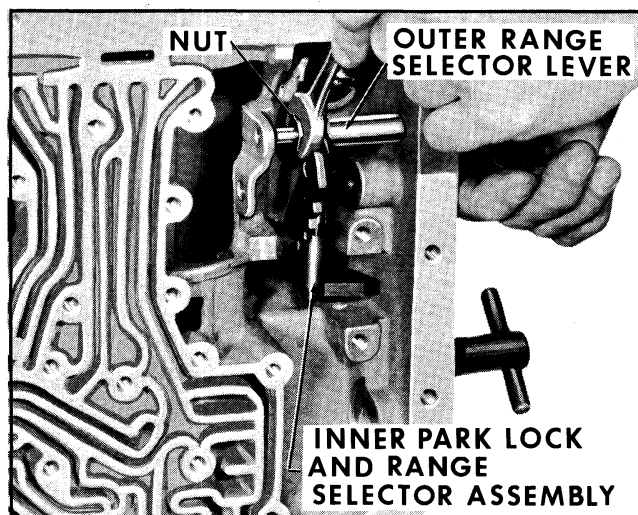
B-117 Installing Inner Park Lock and Range Selector Assembly
